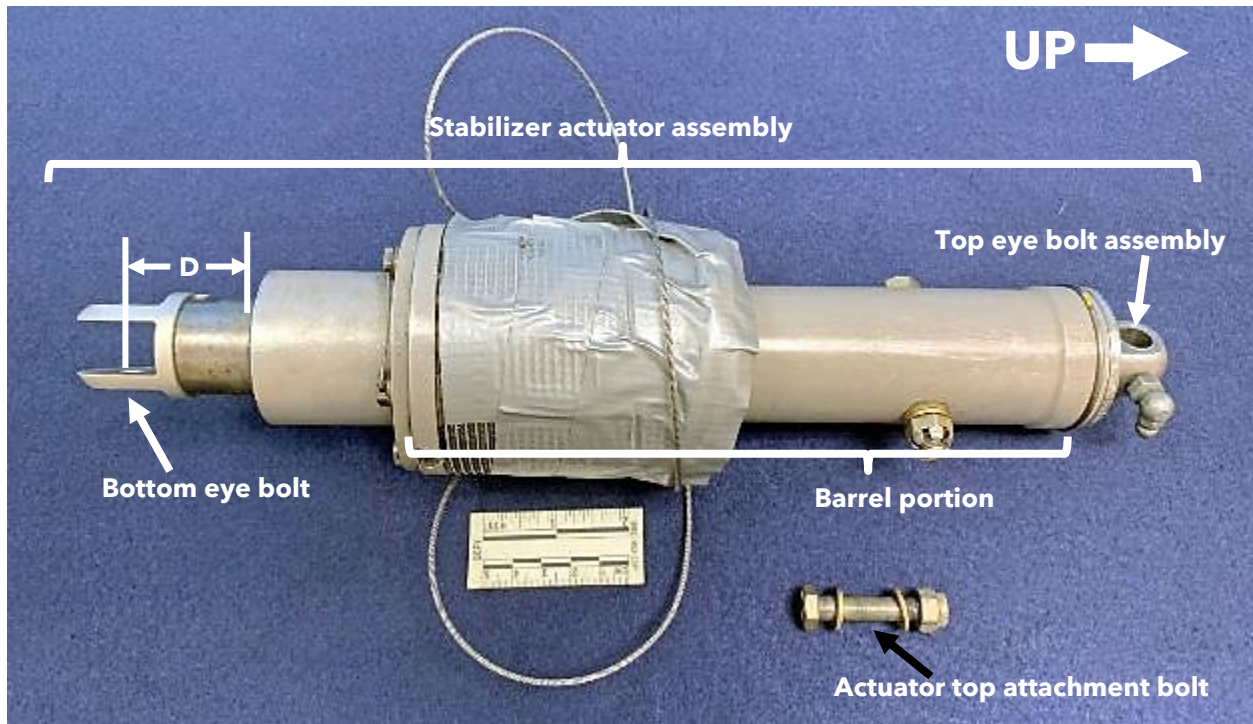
Exemplar horizontal stabilizer trim actuator assembly.
